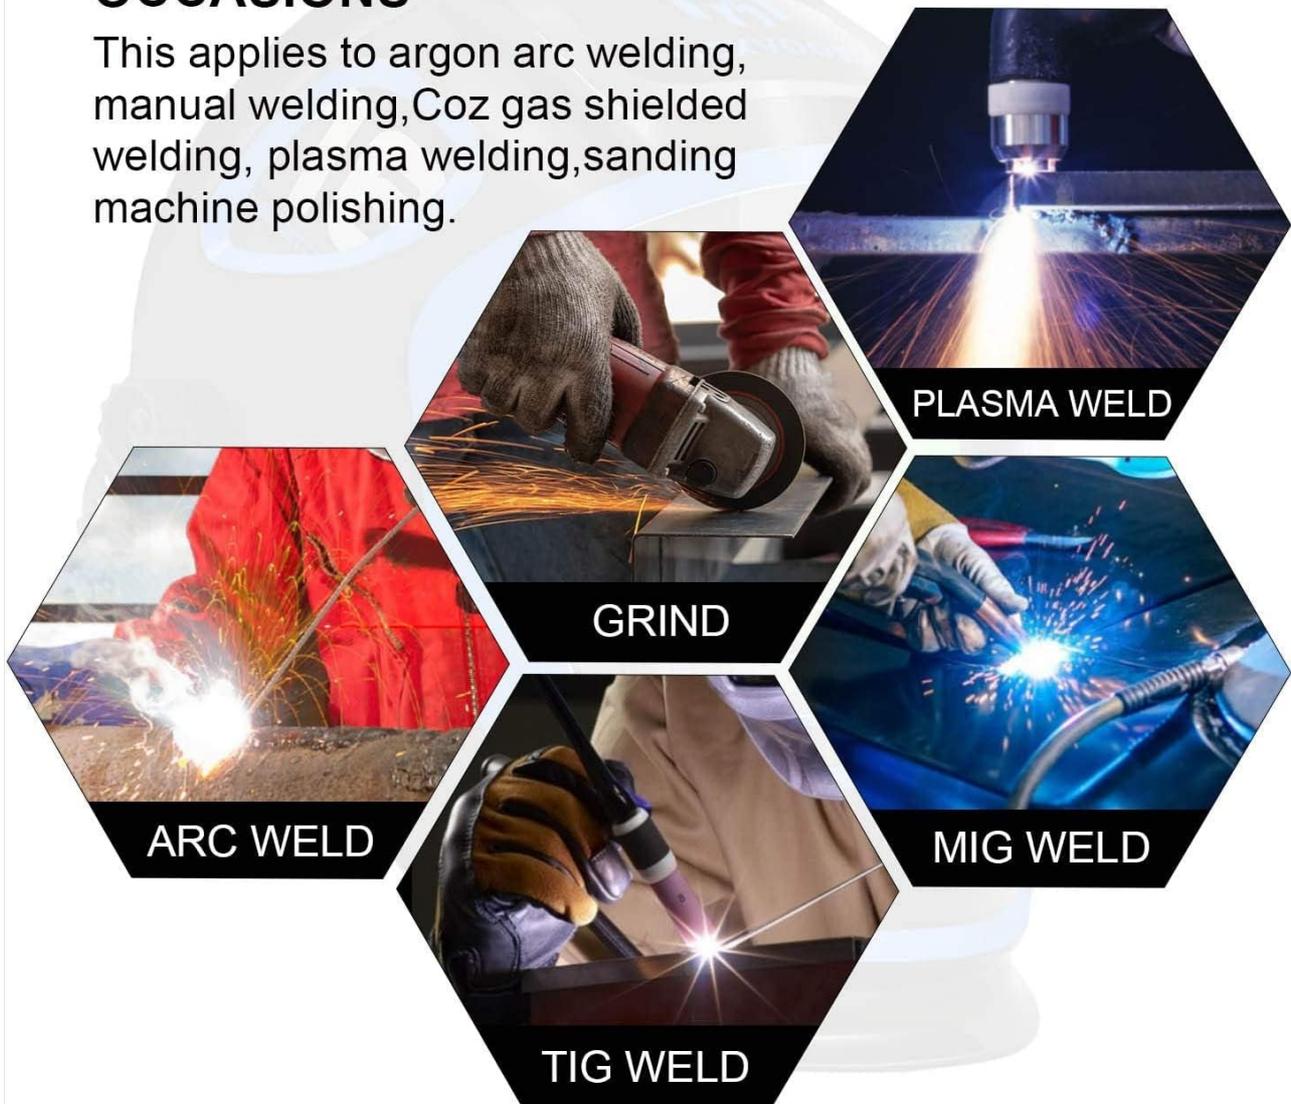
The helmet is suitable for various welding processes and grinding.
